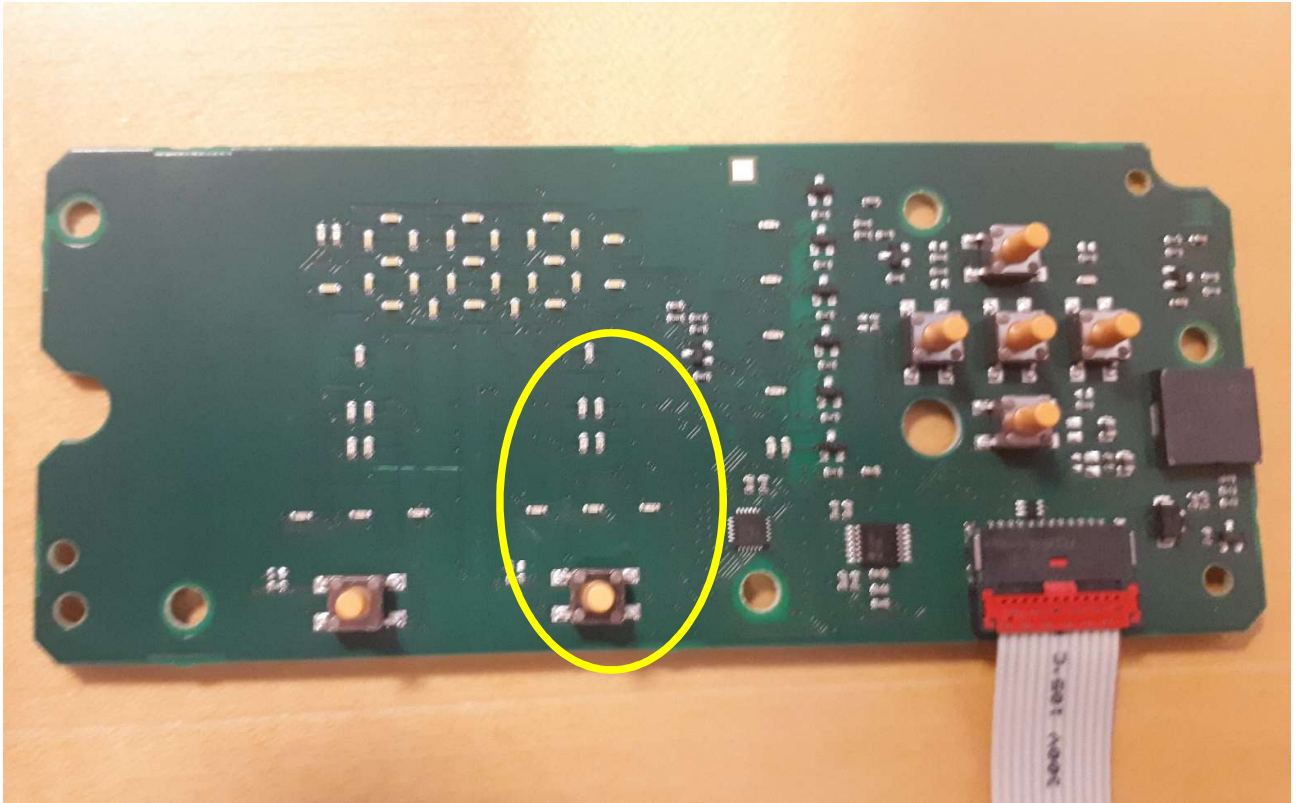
Top view of LC 231 2x1-7.6 DOL PI HMI PCB. Components inside yellow circle is not mounted in LC 231 1x1-9.6 DOL PI.
